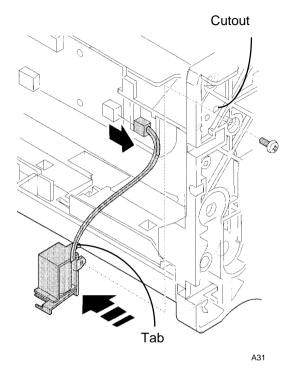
Removing the Transfer Drum Cleaning Solenoid
